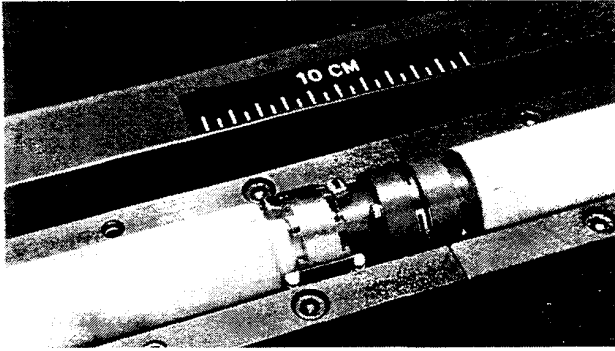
Flanged coupling between two ceramic segments of the rotating shaft as schematically shown in Fig.3.
